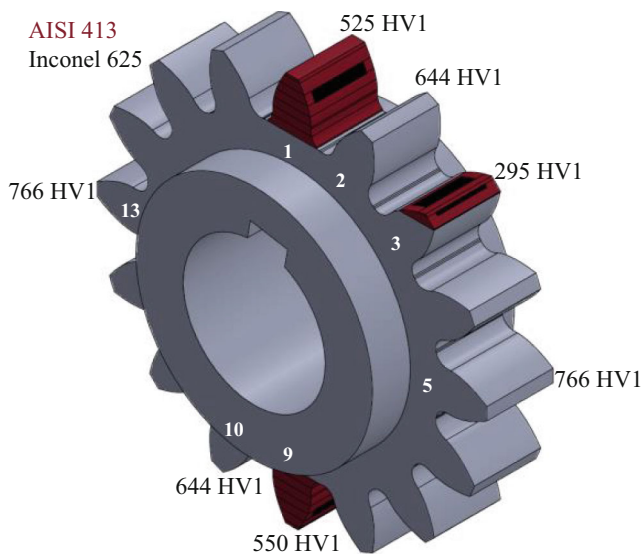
Material transition zone over the tooth flanks: AISI 413 in red and Inconel 625 in black. Hardness assessment after DLD
